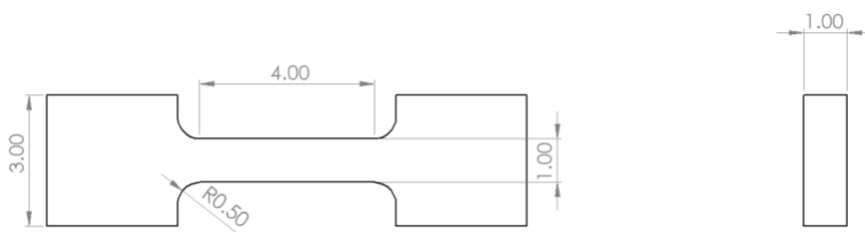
Dimensions of the micro-tensile test sample (in mm)
